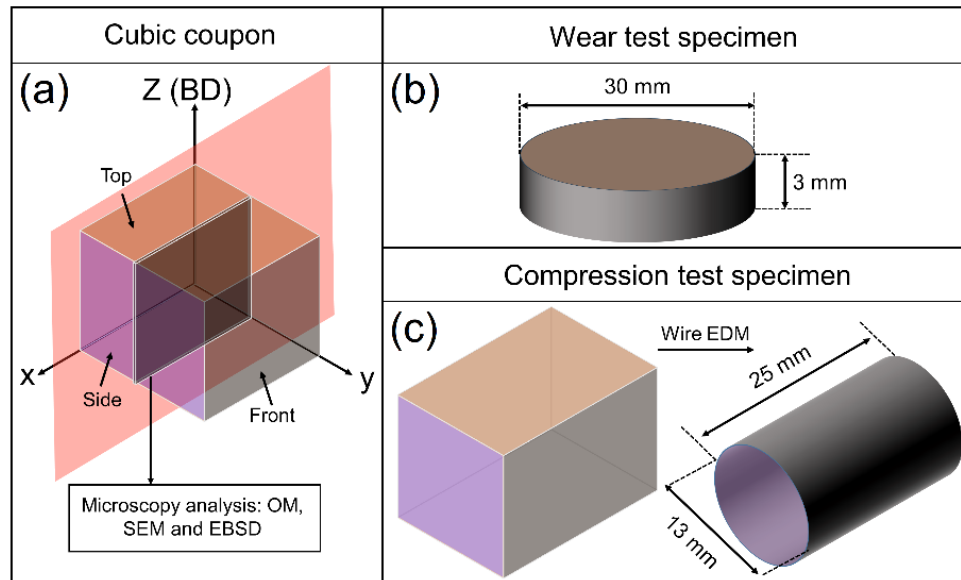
Schematic view of the fabricated: (a) cubic samples, (b) wear test specimen, and (c) compression test specimen. As shown in (c), the printed cuboid specimens were subjected to wire electric discharge machining (EDM) to extract cylindrical compression test samples, as per ASTM-E9-09 standard. (Note: The provided dimensions are not proportional to the actual size).
